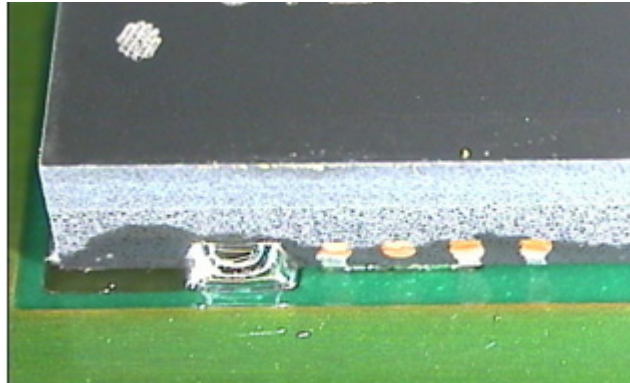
Assembled DFN/QFN with Shorts/Bridging Defects
